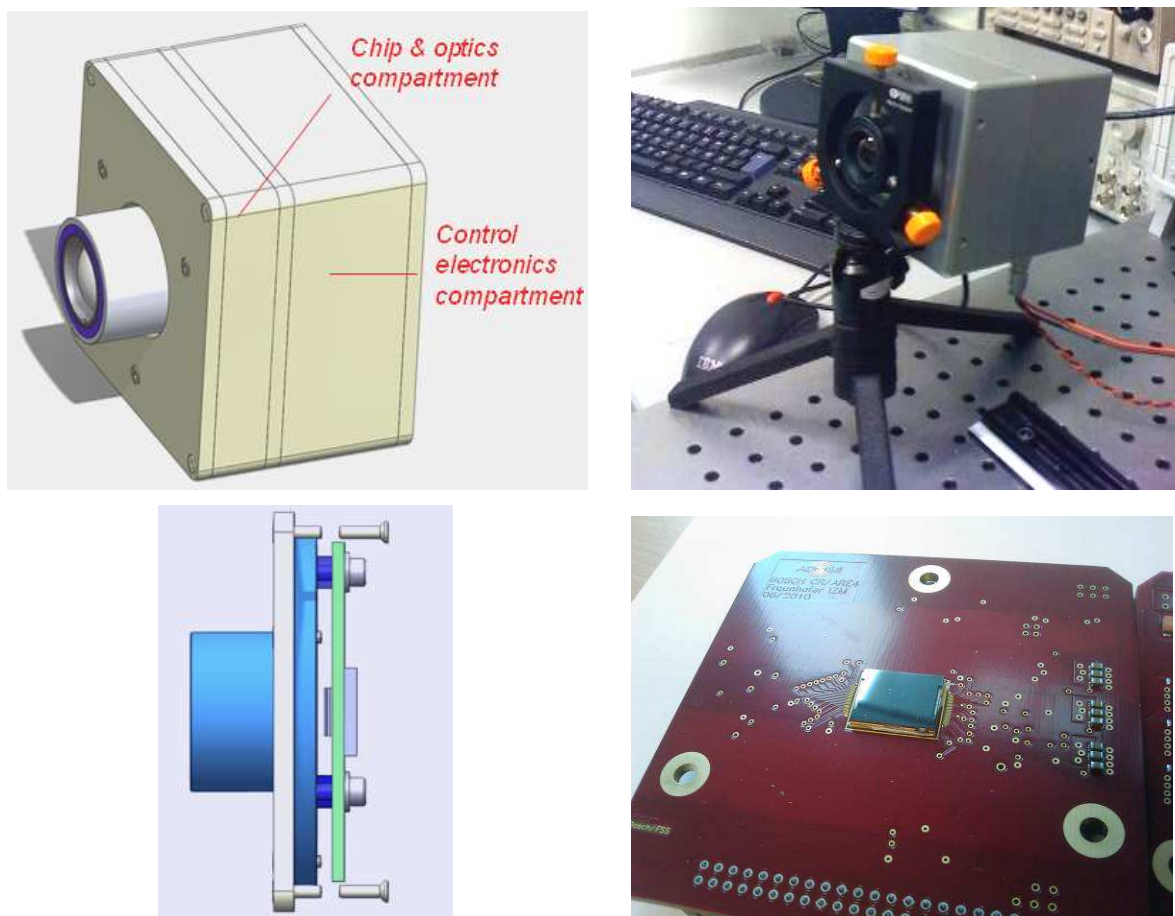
ADOSE FIR camera (design and prototype; top) and final setup with chip on board FIR array mounted on the lens assembly (bottom)
